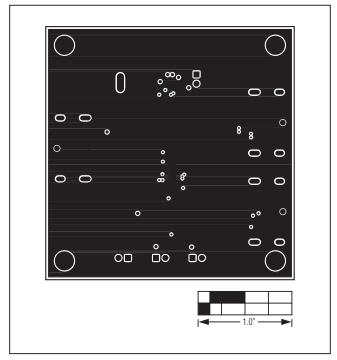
MAX14998 EV Kit PCB Layout—Inner Layer 2
